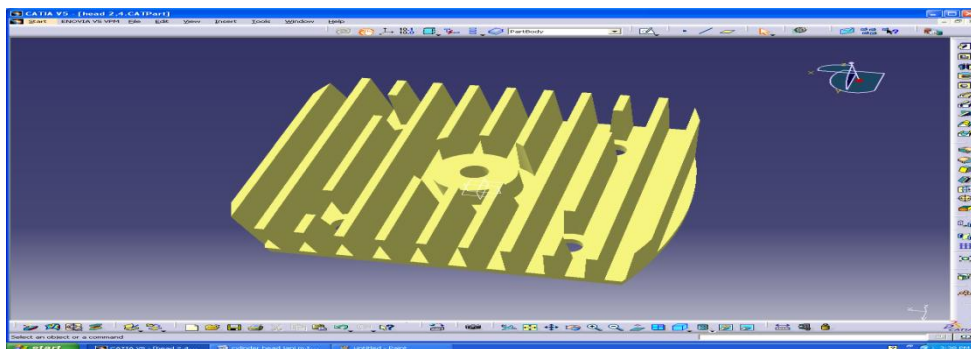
Final model of Cylinder head with fin thickness of 2mm at top 4mm at bottom
